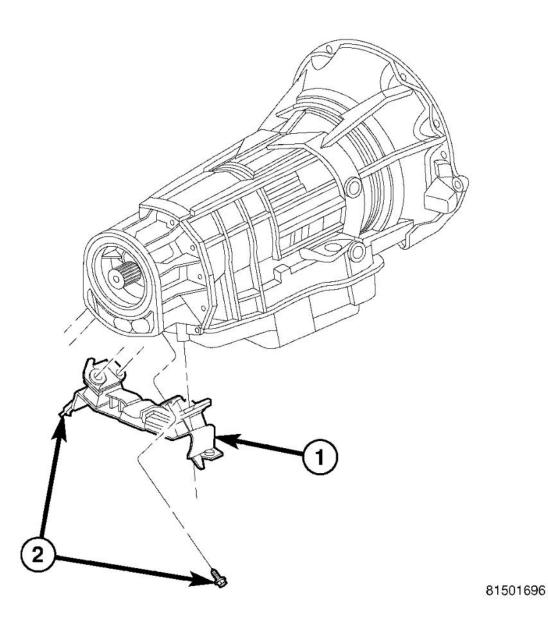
Removing/Installing Engine Rear Mount (4X2) Courtesy of CHRYSLER LLC
